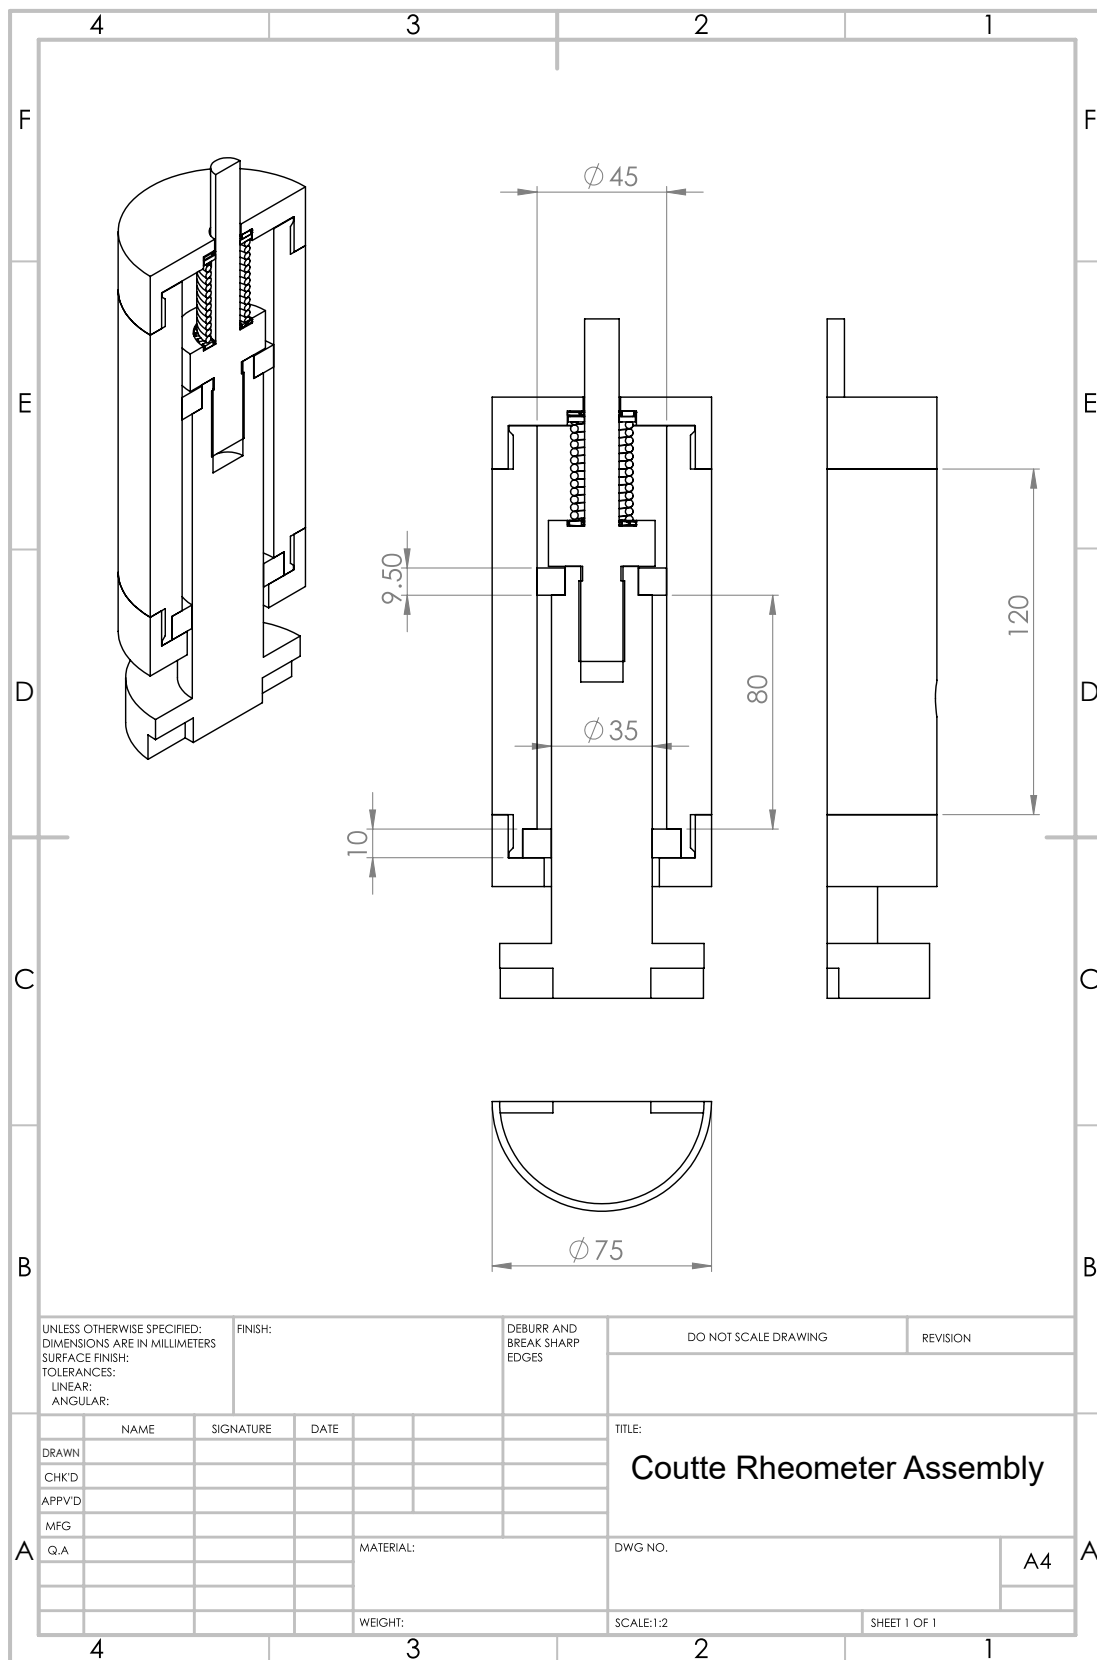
Technical drawing of the Couette Rheometer setup. Measurements shown in millimeter (mm).
